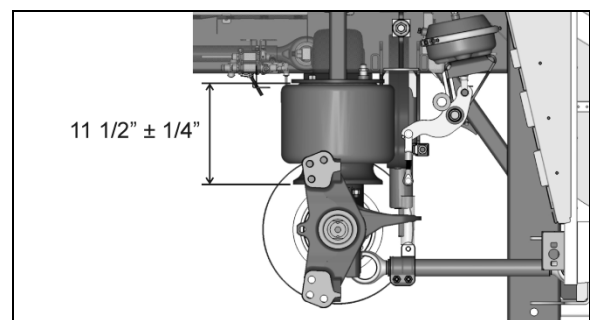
TAG AXLE AIR SPRING CLEARANCE 16195
